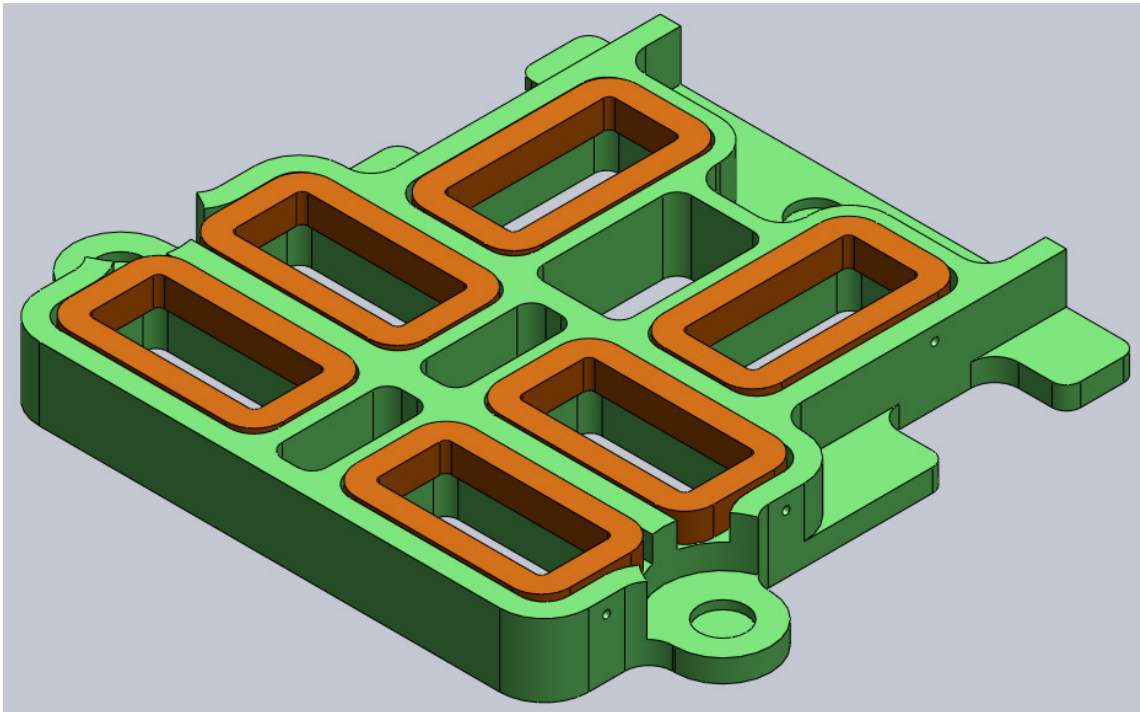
A 3-D assembly drawing of the platen's frame with six coils.
